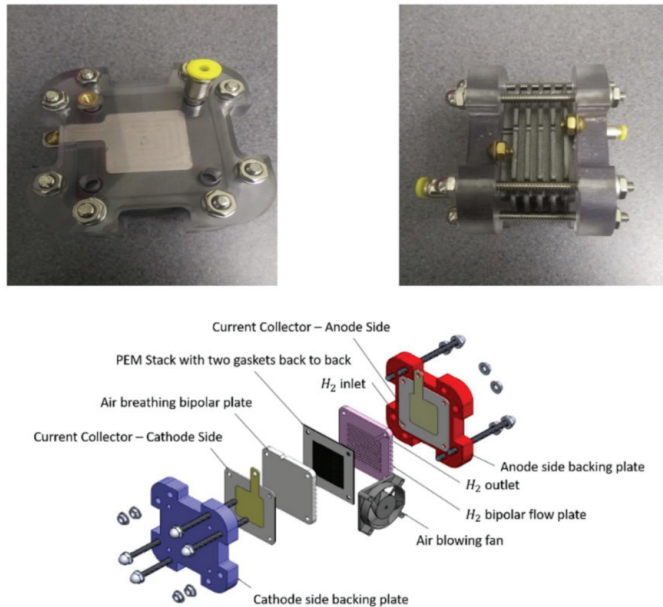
Exploded view of PEMFCs. Source: [4]
